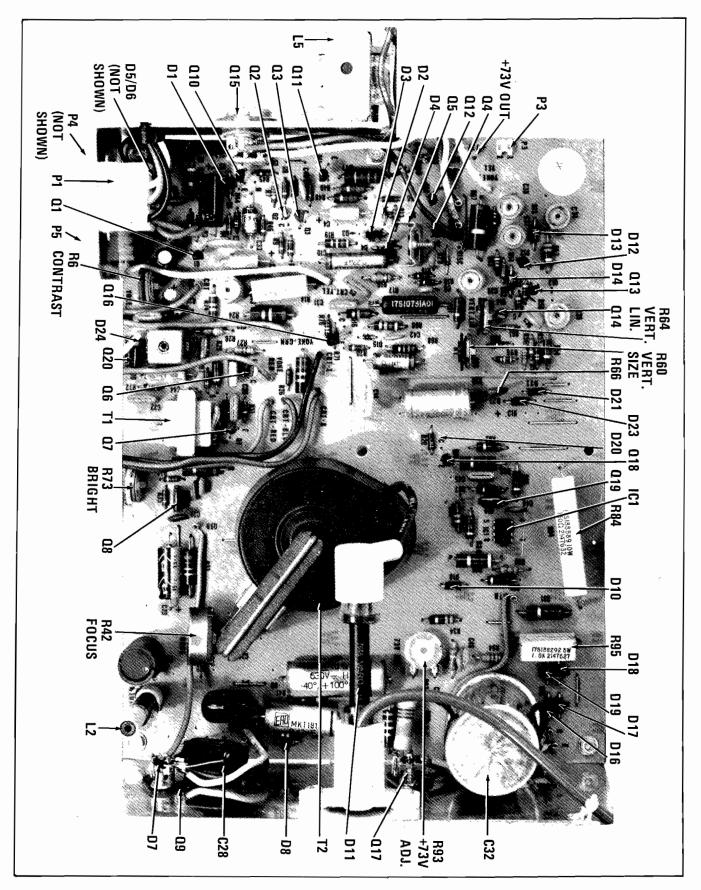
Motorola Monitor Circuit Board Detail—Component Location
